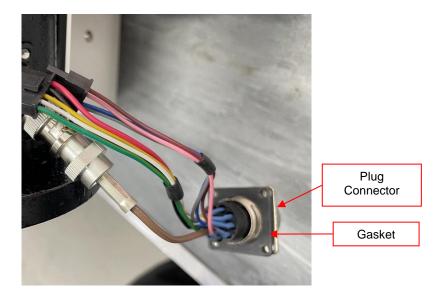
Carefully Pull Out the Removable Plug, Gasket, and Attached Wires
